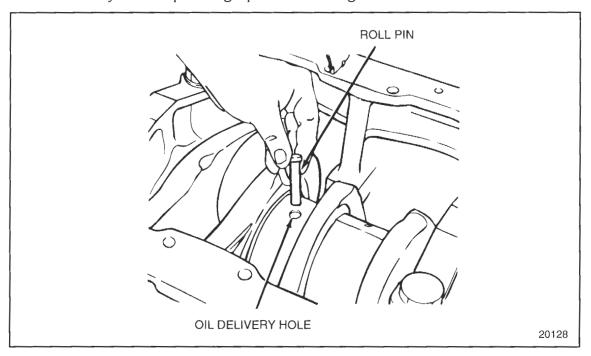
Upper Main Bearing Shell Removal and Roll Pin Installation
